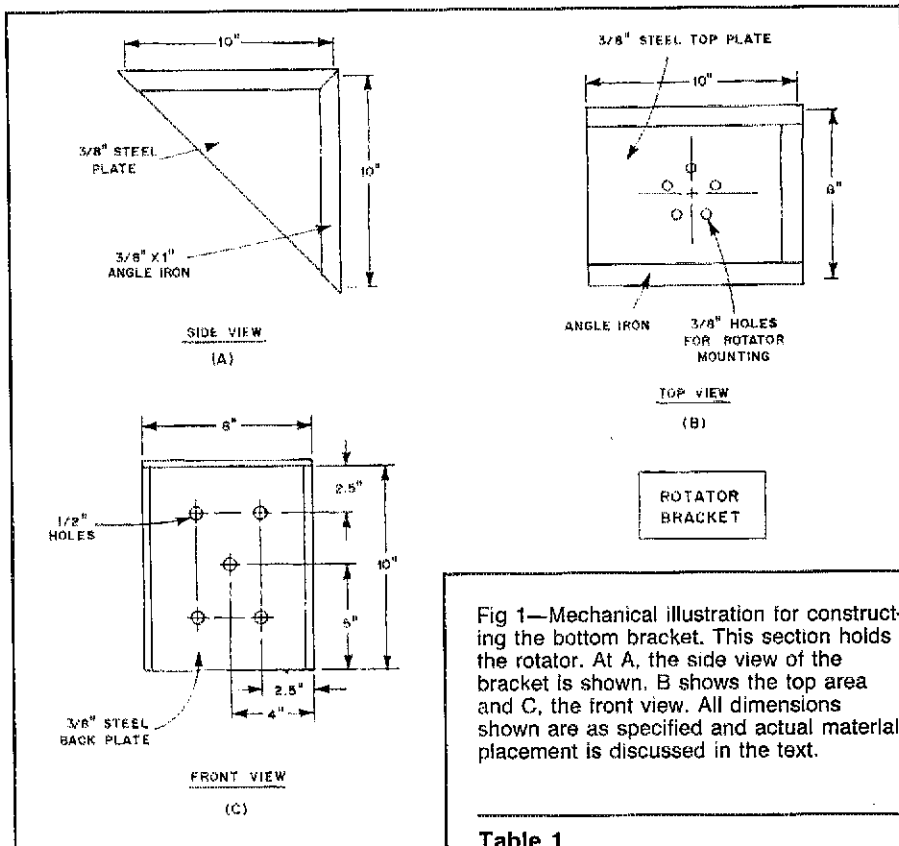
Mechanical illustration for constructing the bottom bracket. This section holds the rotator. At A, the side view of the bracket is shown. B shows the top area and C, the front view. All dimensions shown are as specified and actual material placement is discussed in the text.
